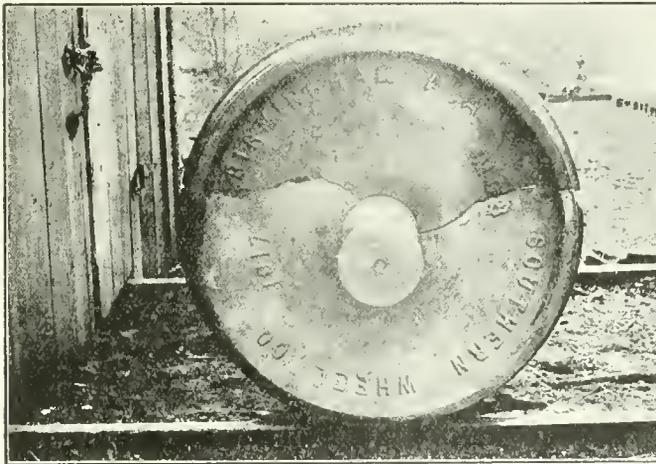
FRONT VIEW OF BROKEN WHEEL, SHOWING RADIAL LINES OF RUPTURE PASSING THROUGH CHAPLETS IN FRONT PLATE. INITIAL POINT OF RUPTURE BELIEVED TO BE AT RIM ON RIGHT SIDE
